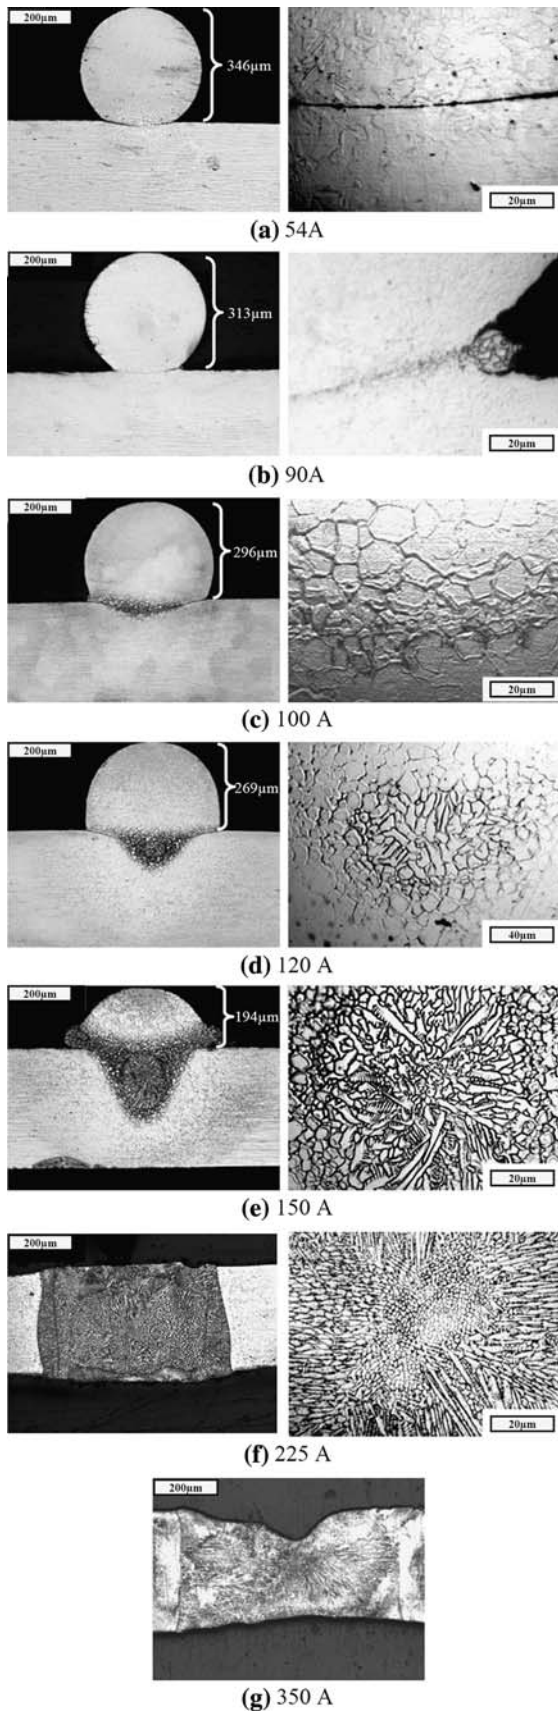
Weld cross sections for RMW 316 LVM using 1.5 kg-f weld force.
